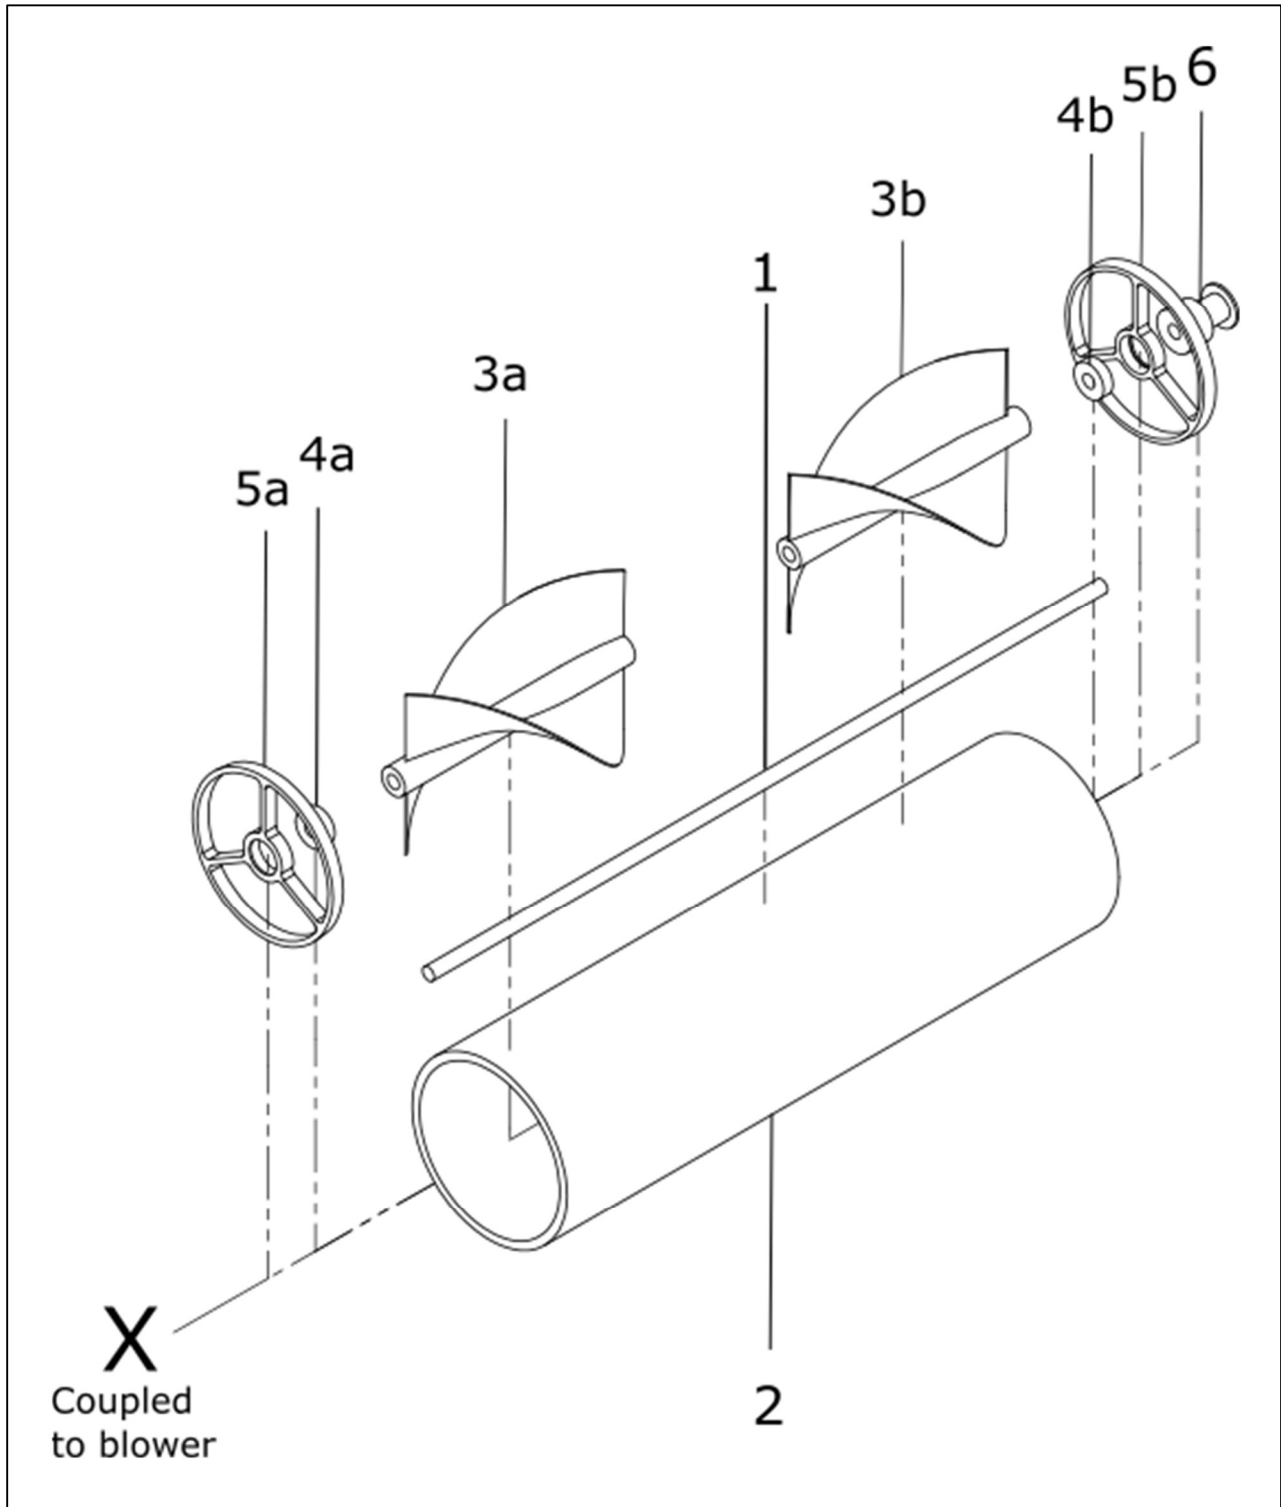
Labeled assembly diagram of experimental setup (exploded view)
